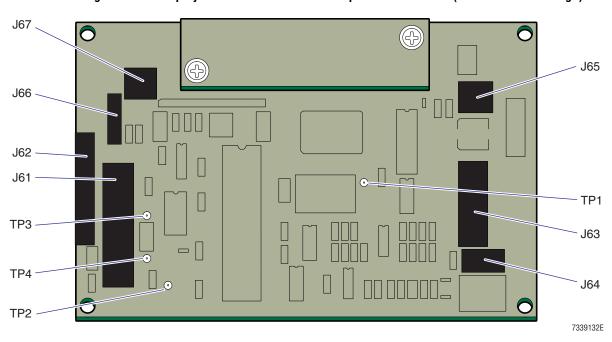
Display Controller Driver Card Component Locations - (Surface-Mount Design)
